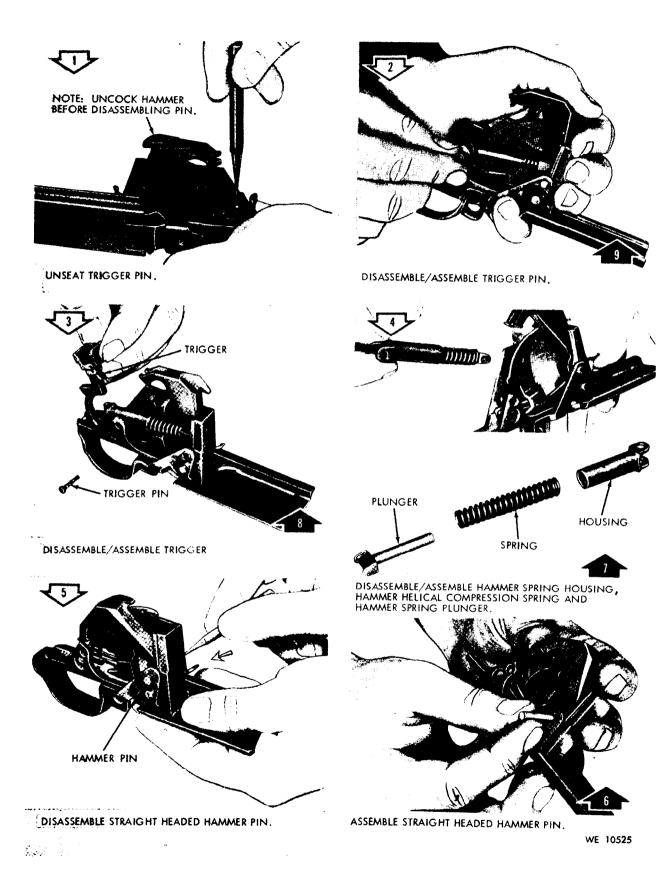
Disassembly/assembly of trigger housing assembly. (1 of 2)
